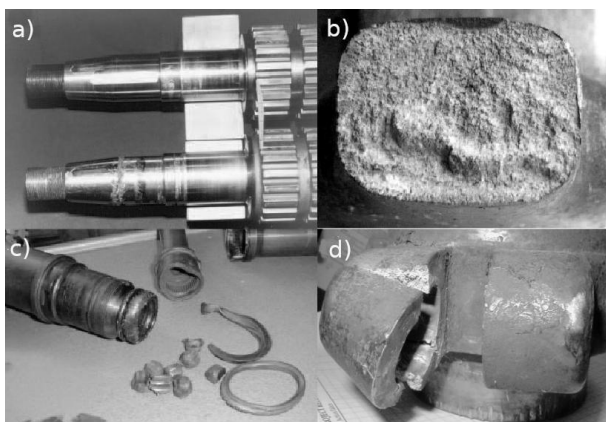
a) typical ship component before and after refurbishing process, [13], b) brittle fracture surface of high stress chain, as a result of heat treating problem [3], c) yielding fracture of UH-1 helicopter engine shaft, and bearing components [3], d) ductile fracture of 2 ½ inch hose fitting- deformation and fracture [3]
